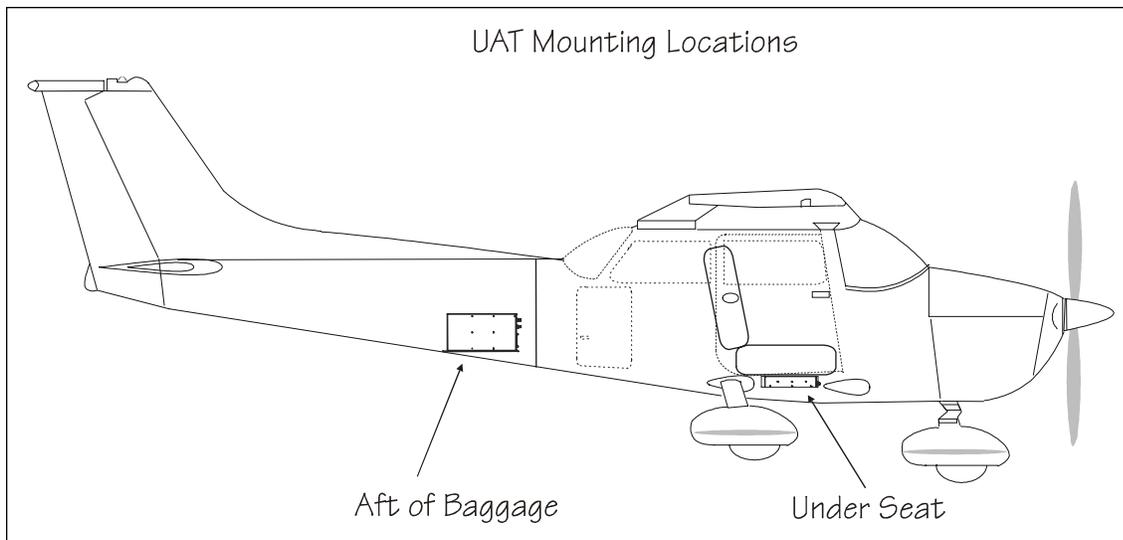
Single Engine Aircraft GDL 90 Mounting Locations
